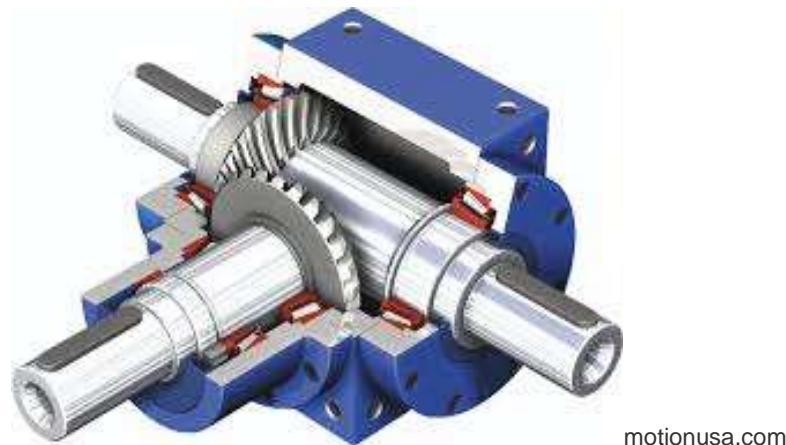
SHOWING A TYPICAL DUAL OUTPUT SHAFT GEARBOX.
